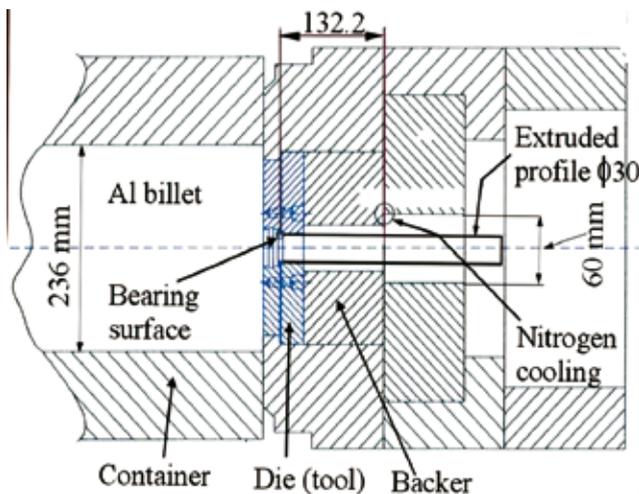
Schematic depiction of die assembly with the main dimensions and cooling spot
